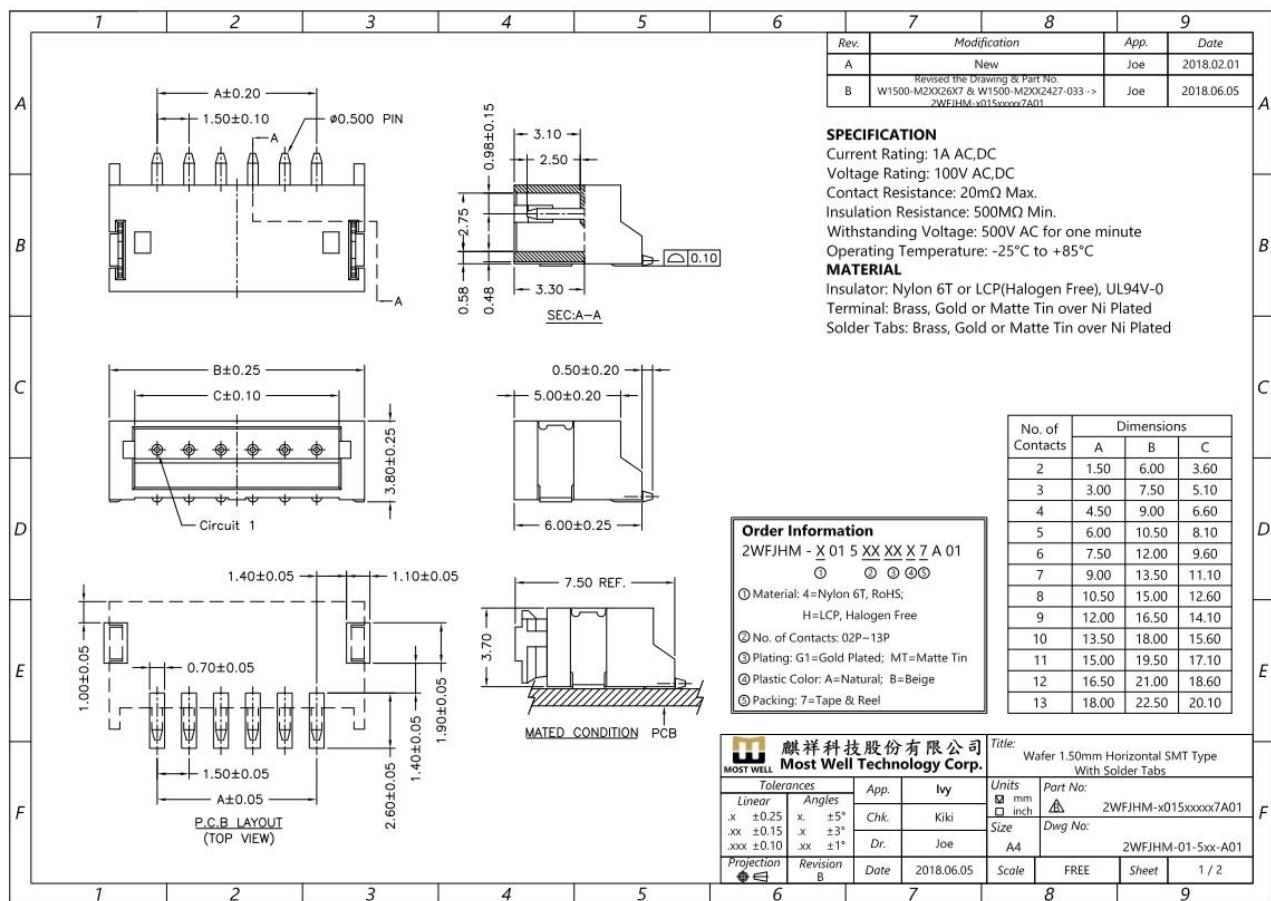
Wire to Board SMD 1*13P Connector Drawing
